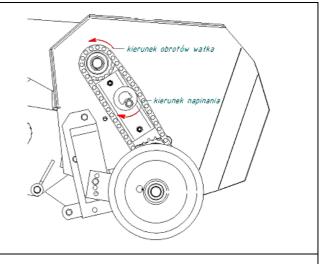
ADJUSTMENT OF THE PICKUP DRIVE AND SCREW FEEDER CHAIN (LEFT SIDE)
